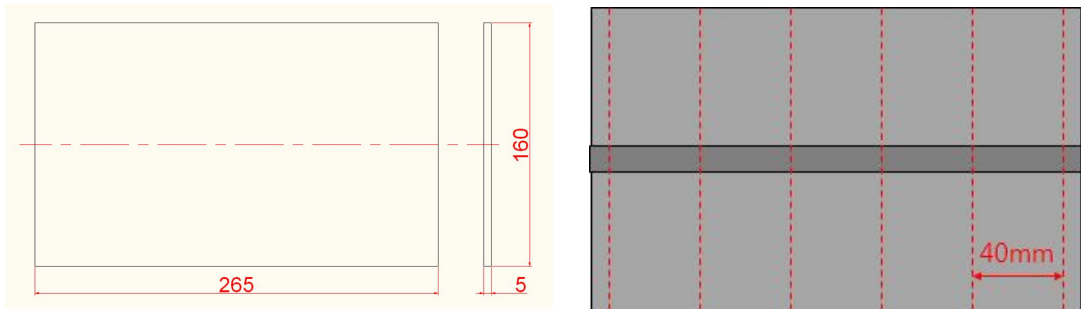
Design drawings of flat panel welded specimen
